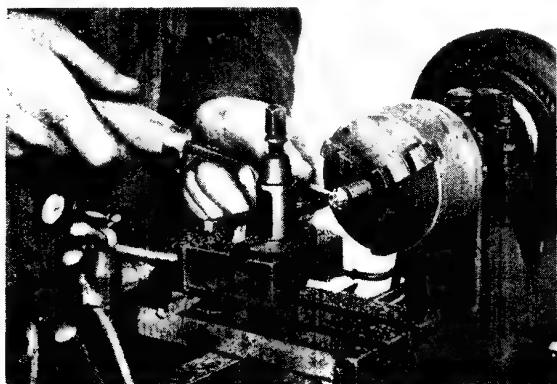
Turning is being carried out in this photograph. A brass rod is being rotated, and one of the tools seen in Fig. 3 is employed to turn it
